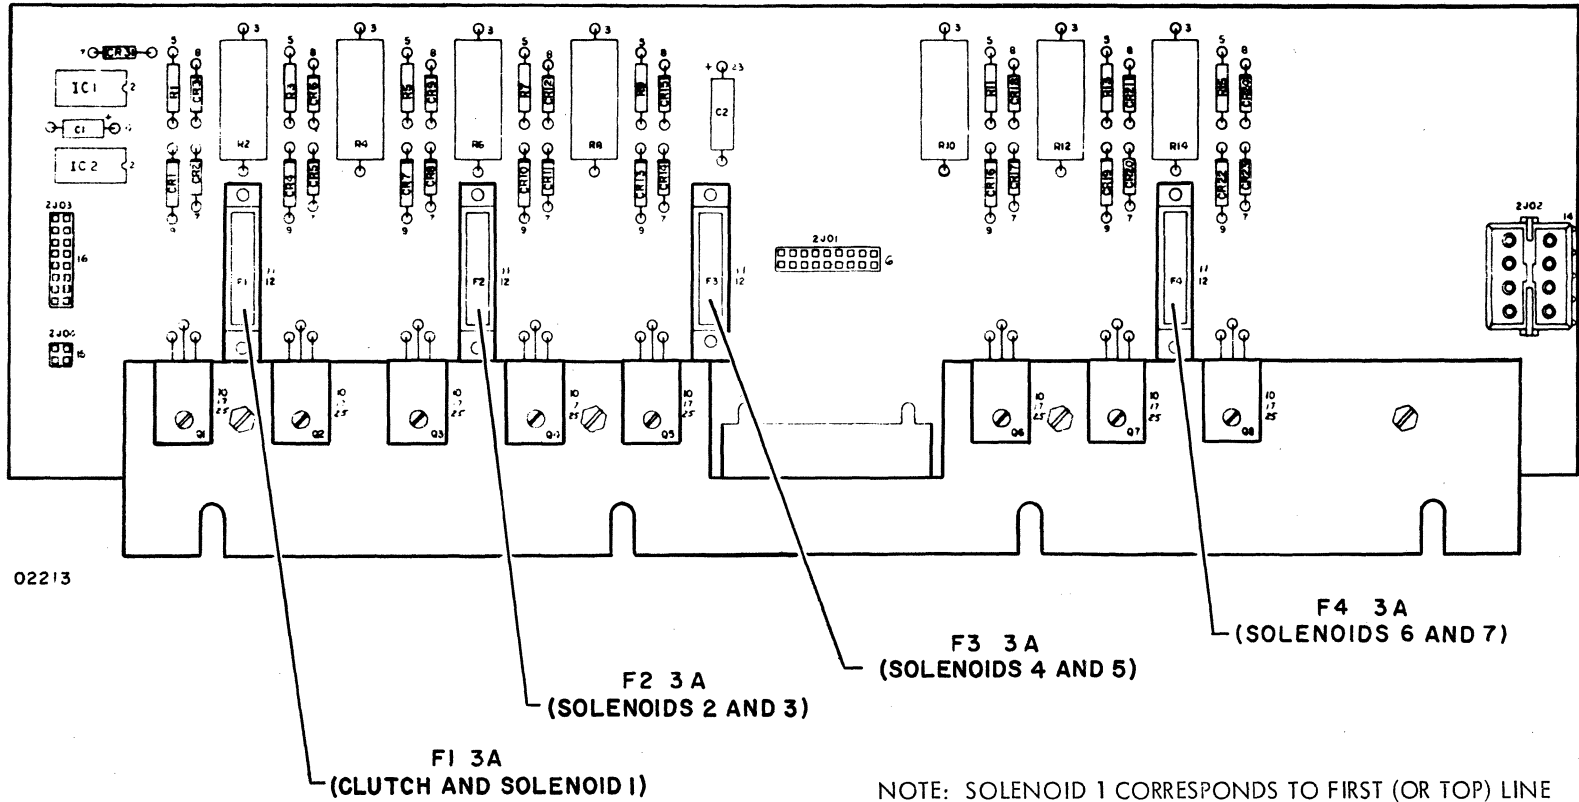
IMP8. Solenoid Driver Board with Fuse Identification
